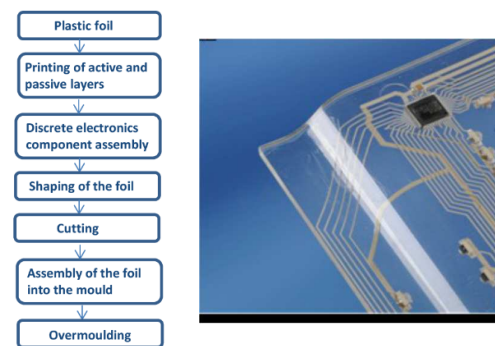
Hybrid in-mould integration process flow and an example of overmoulded optical touch panel [8]
